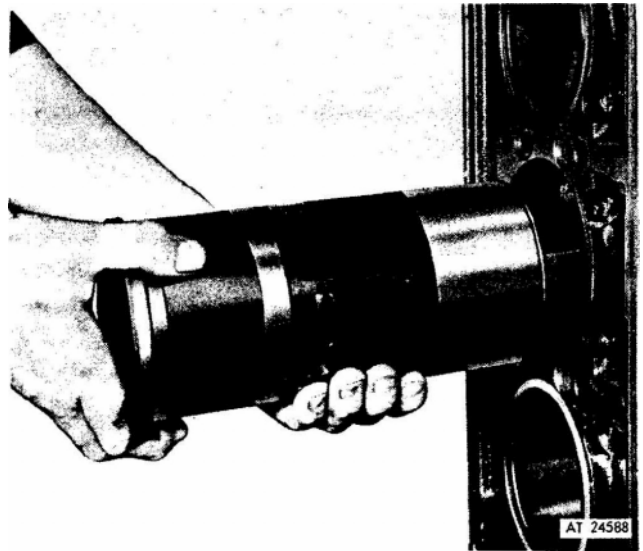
Installing piston, connecting rod and liner assembly in cylinder block.
